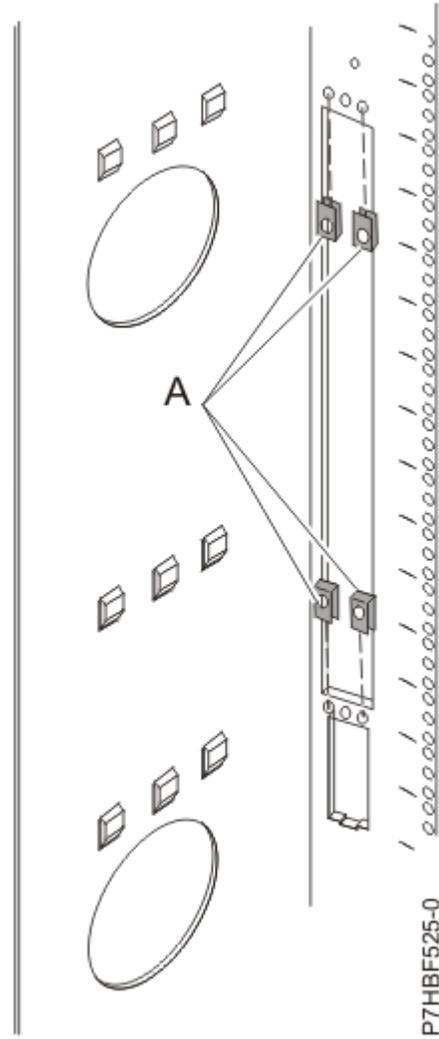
Attaching nut clips to the rack mounting flanges from the rear of the rack
